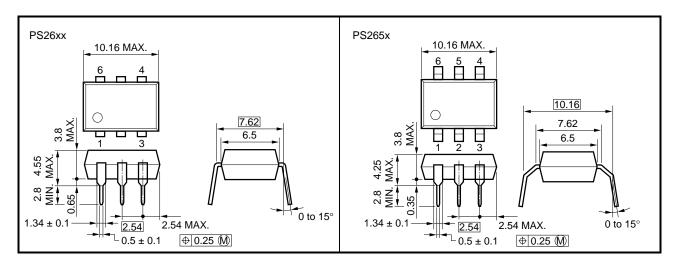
Package Dimensions of PS26xx Series (Unit: mm)
